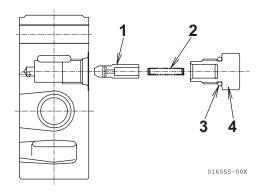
Check valve section (Bucket Section for Combined Oil)
